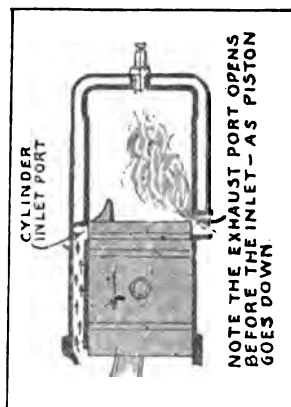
Note the exhaust port on a two-cycle engine opens slightly before the cylinder inlet port or "by-pass" opens.
